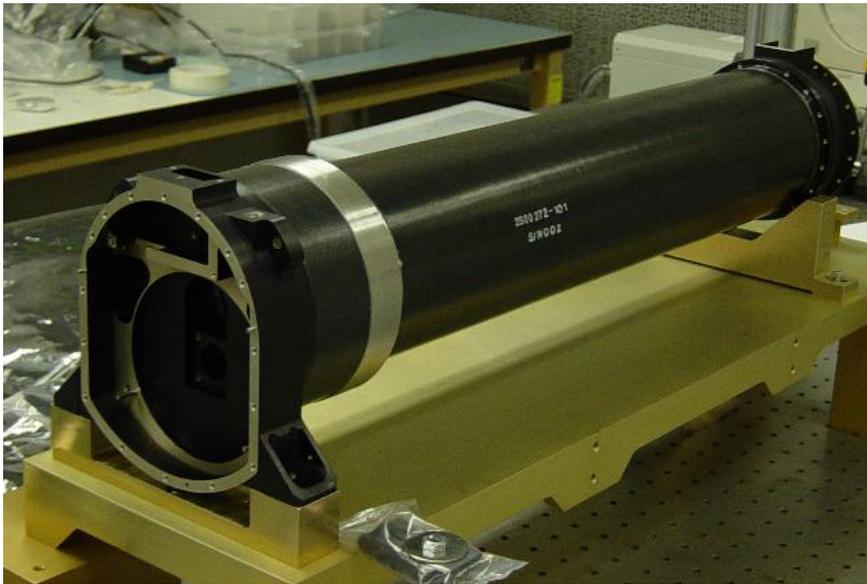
EUVI flight metering tube with filter wheel and shutter housing viewed from the back.
